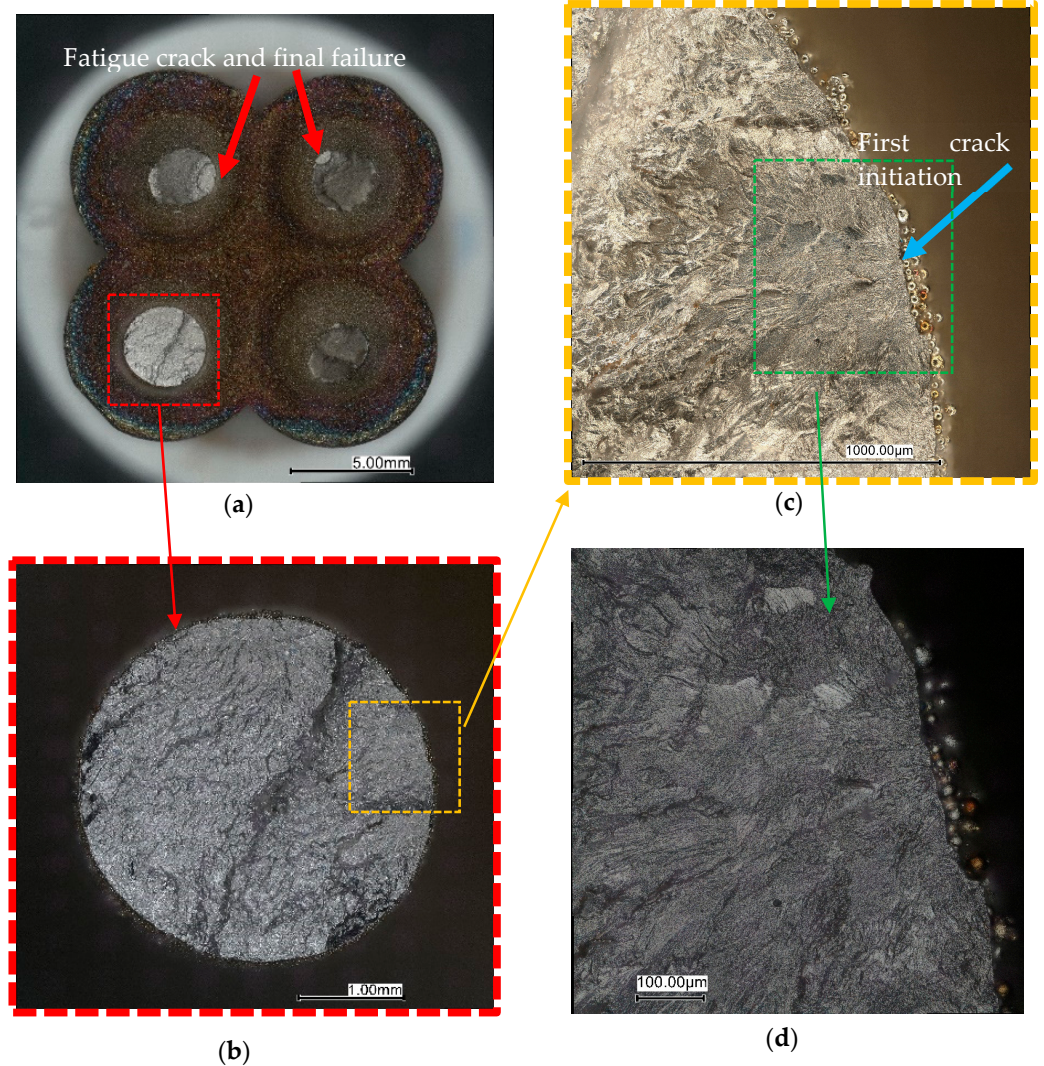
Fracture surface of the N4 geometry tested at a maximum stress level of 420 MPa: (a) fracture surface after the fatigue test, (b) the first rod fracture surface, (c) the first fatigue crack initiation site, (d) the surface defect at first fatigue crack initiation.
